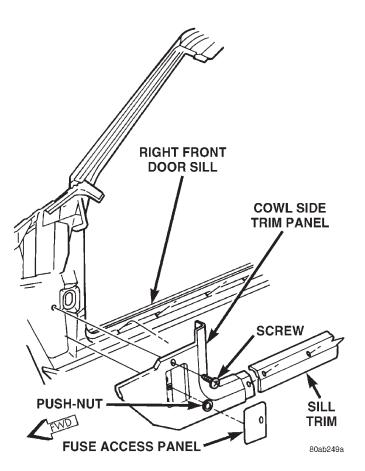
Right Cowl Side Inner Trim Remove/Install
